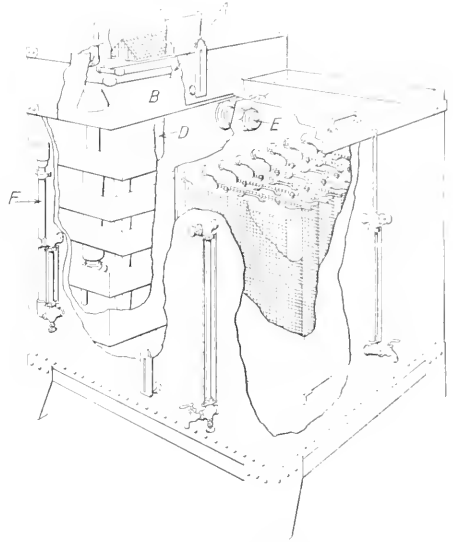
Arrangement of the Parts of the Peterson Oil Filter
